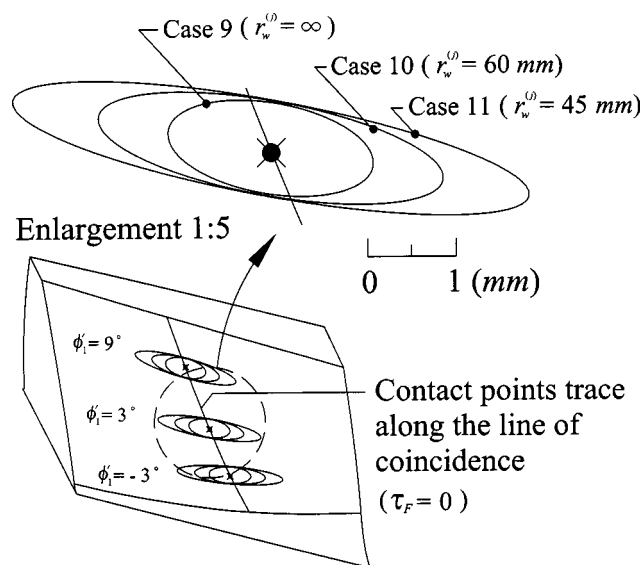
Bearing contacts of helical concave beveloid gear pairs ground by novel grinding method with different $r_w^{(j)}$
